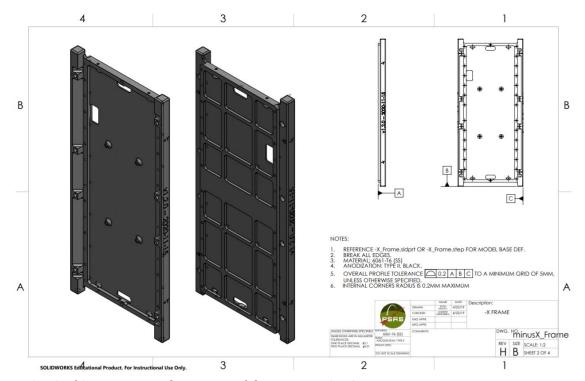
3 of 3 Dimensioned Drawing of the minus X OreSat Frame
